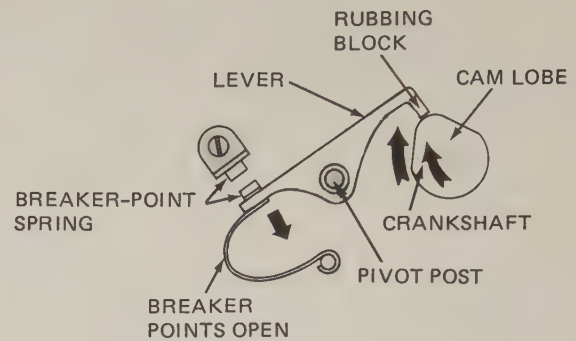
Arrangement with breaker points being opened by a cam working directly on the breaker lever.
